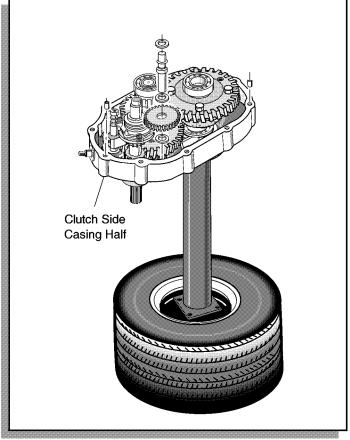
Input Shaft Bearing and Governor Fork Assembly
